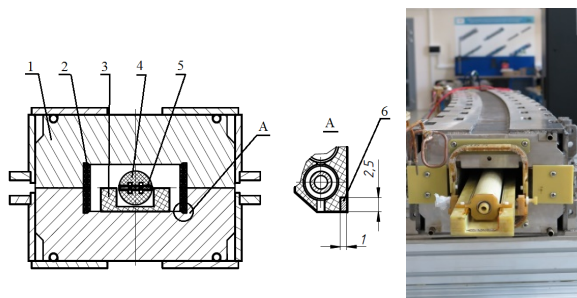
Cross-section view of the bent dipole magnet for the NICA booster with magnetic measurement system. 1. Yoke, 2. Main coil, 3. Base of MMS frame, 4. MMS frame, 5. PCB with harmonic coils, 6. Reference coil.
